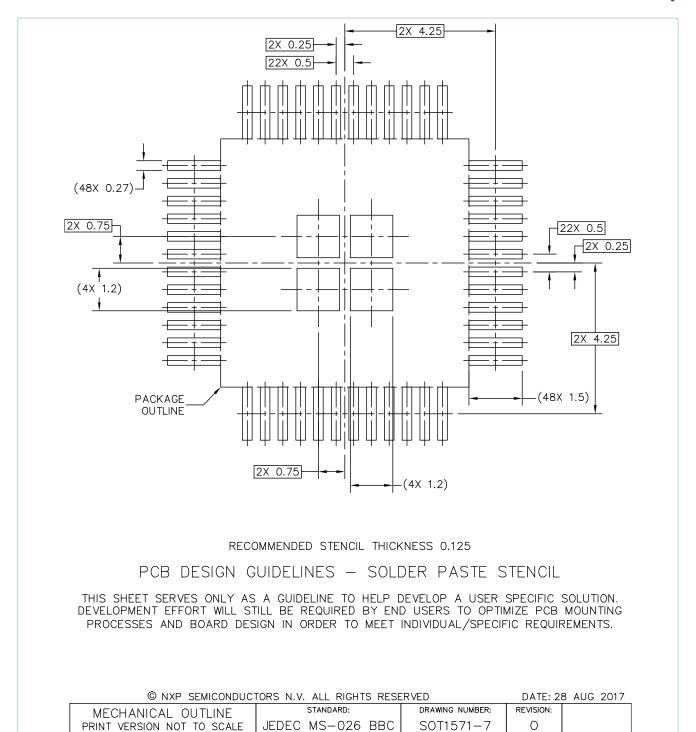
Reflow soldering footprint part3 for HLQFP48 (SOT1571-7)
